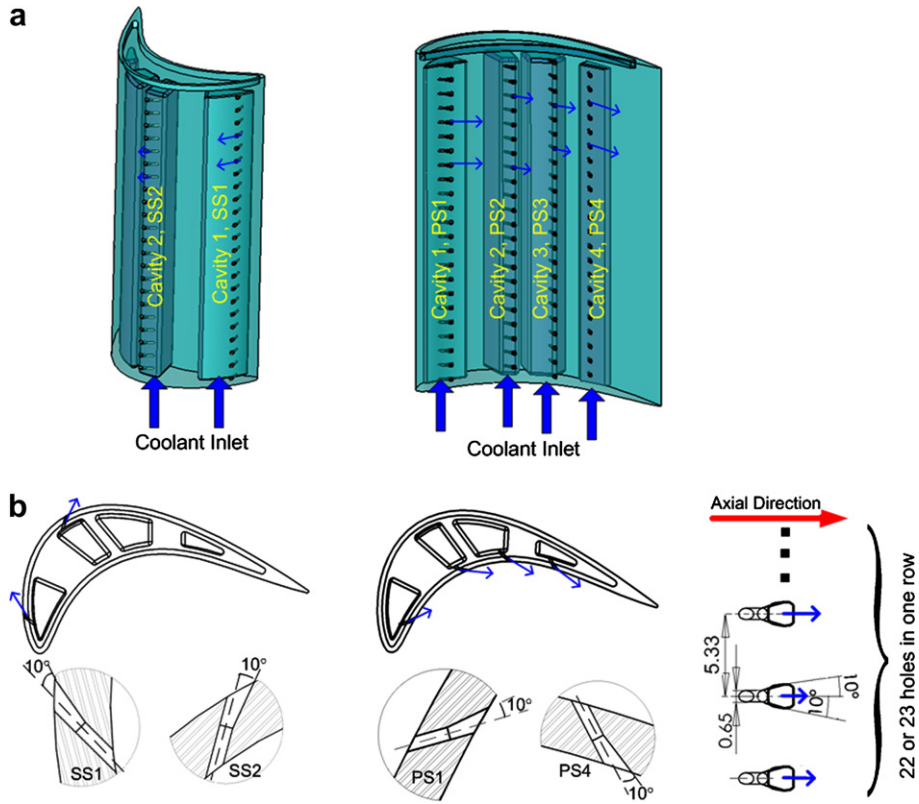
(a) Film cooling holes and cavities (b) axial shaped hole configurations.
